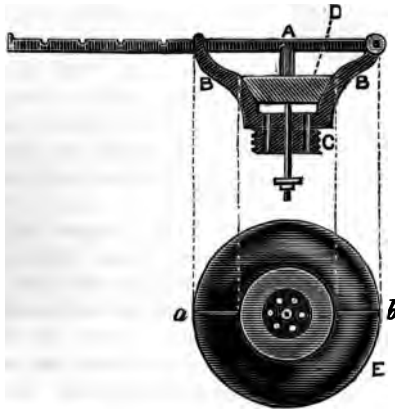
SECTIONAL DRAWING OF SAFETY VALVE.
